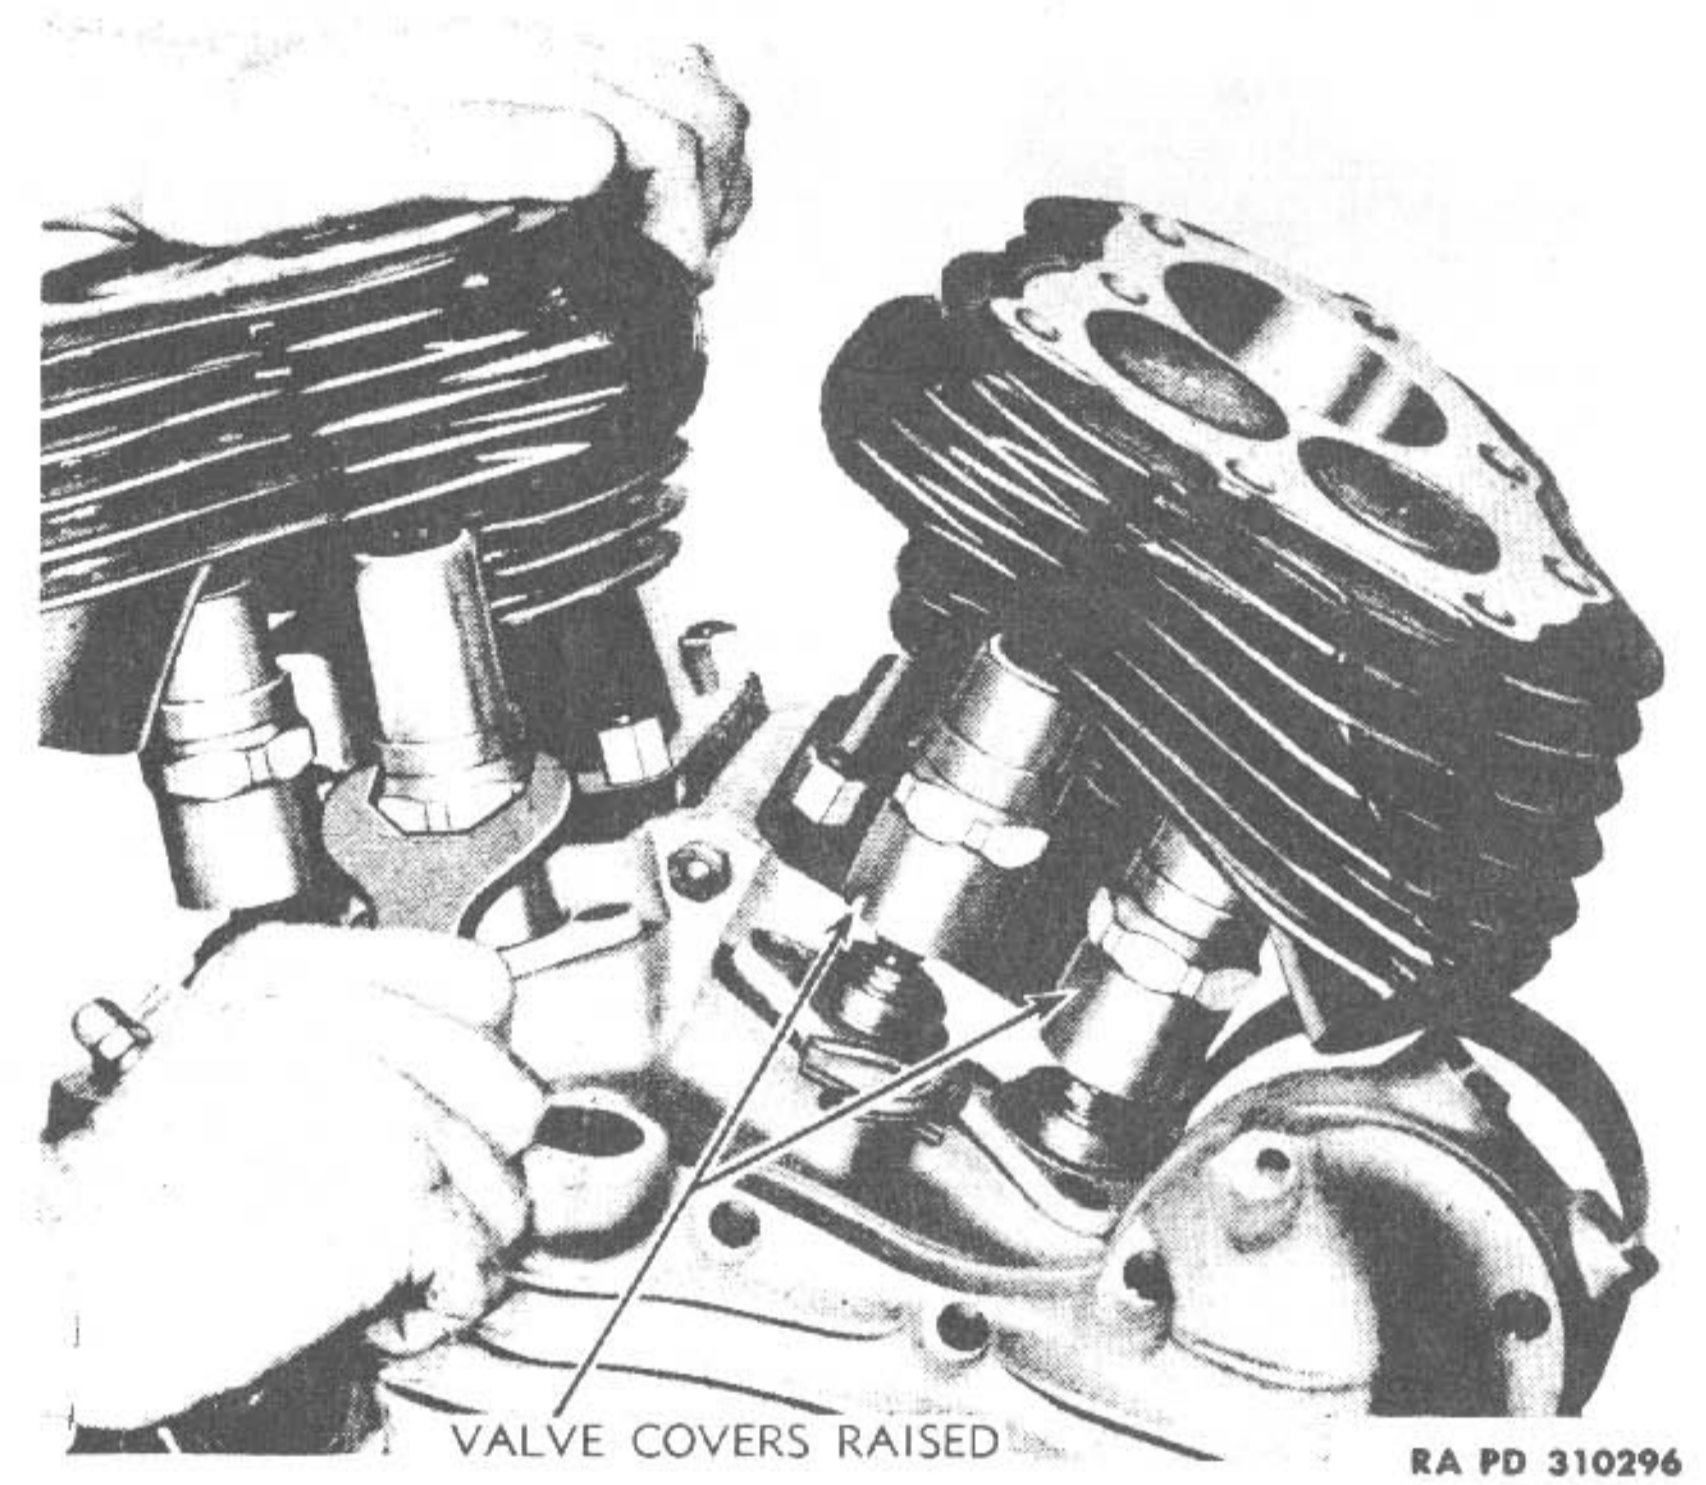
Freeing Valve Covers with Wrench (41-W-3617)
